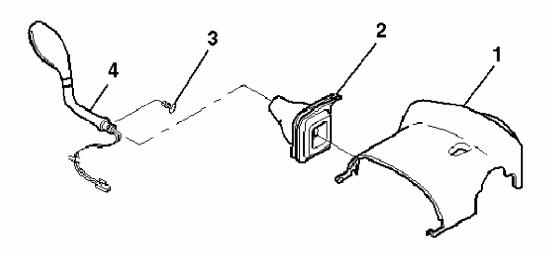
View Of Shift Lever, Seal (Boot), Screw & Upper Trim Cover Courtesy of GENERAL MOTORS CORP.
